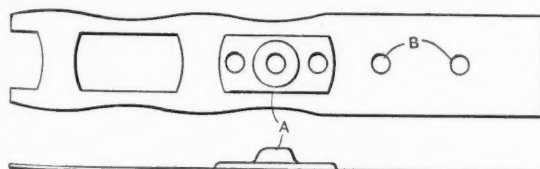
Appearance of the Stock from which Plates A are Blanked
